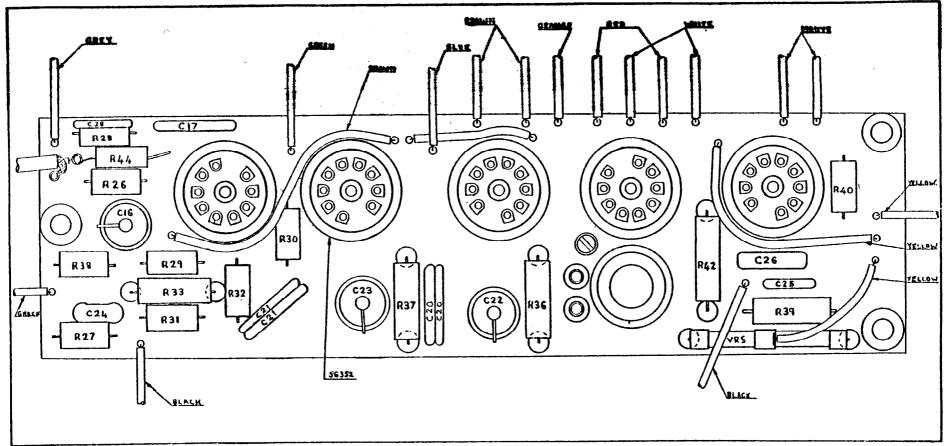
641 Amplifier - Circuit Board Assembly Part No. 026622
